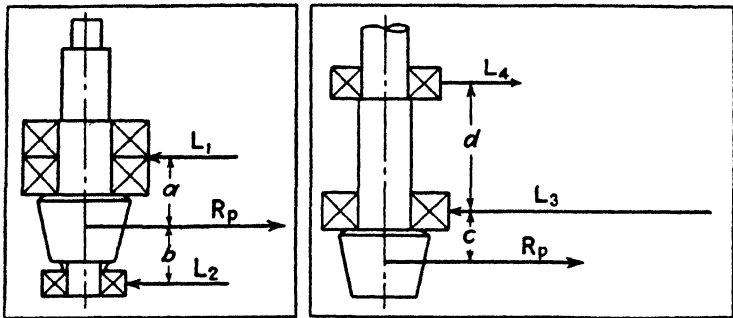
(left).—DIVISION OF BEARING LOAD WITH STRADDLE MOUNTING.
